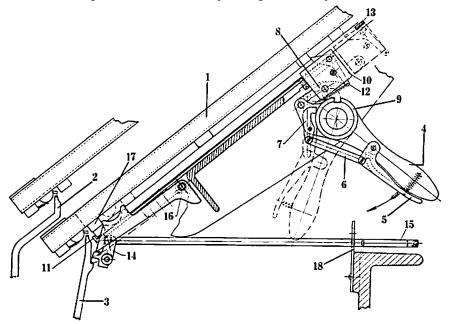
Rear Removal Magazine Frame for Star Base Double Distributor Machines. Two magazine Star Base F and G machines are equipped for rear removal of main magazines, as shown. The withdrawal of the lower magazine is accomplished by opening the channel entrance, moving rod 15 forward and moving operating lever 4 forward. This withdraws the lower magazine I to a point where it will clear the upper escapement rods 2 as the magazine frame is tilted back for magazine removal.
